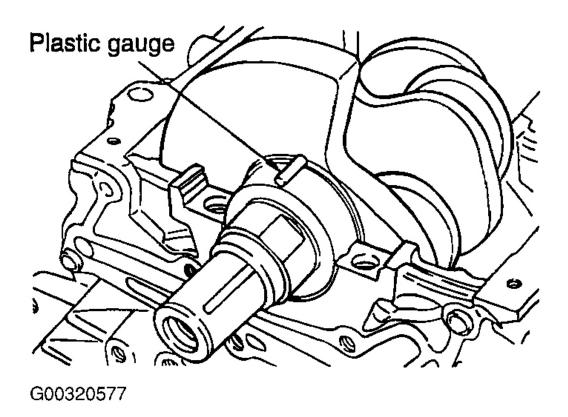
Measuring Oil Clearance Using Plastigauge Courtesy of KIA MOTORS AMERICA, INC.
